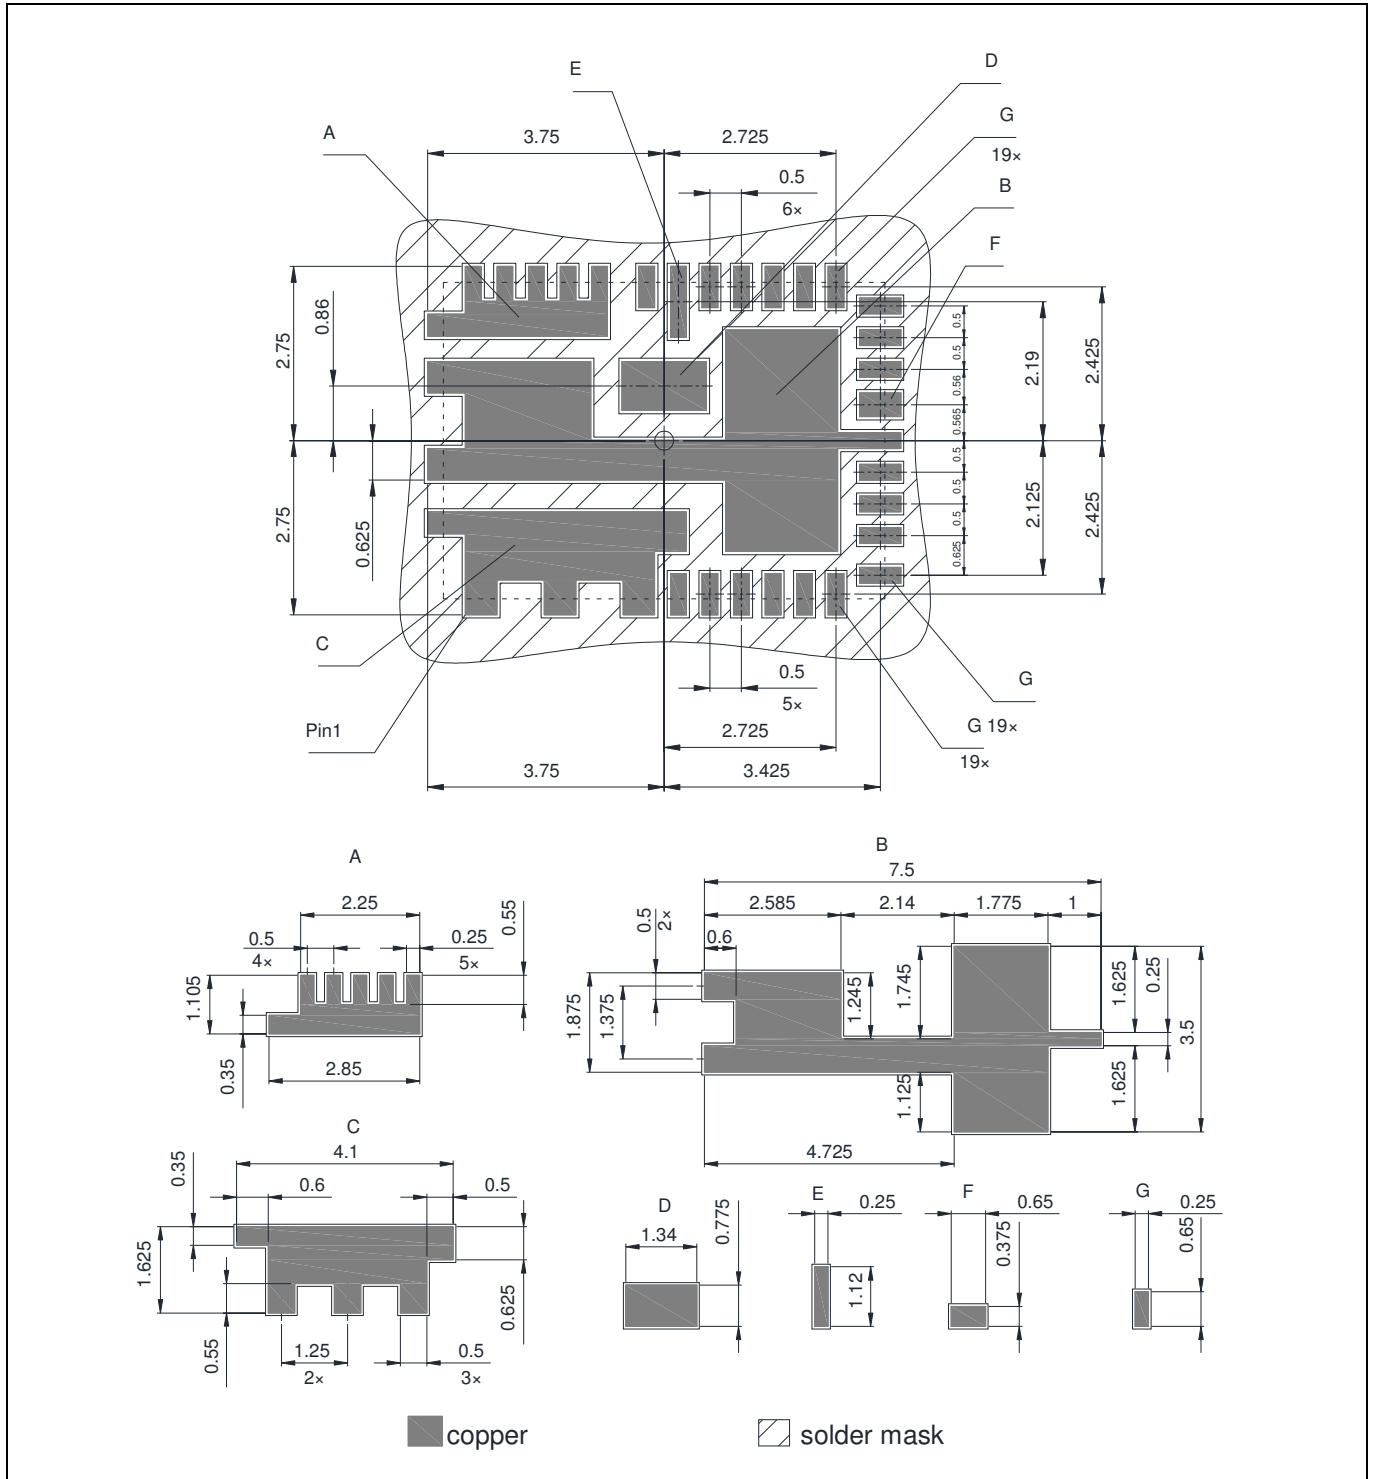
PCB metal and Solder mask (all dimensions in mm)
